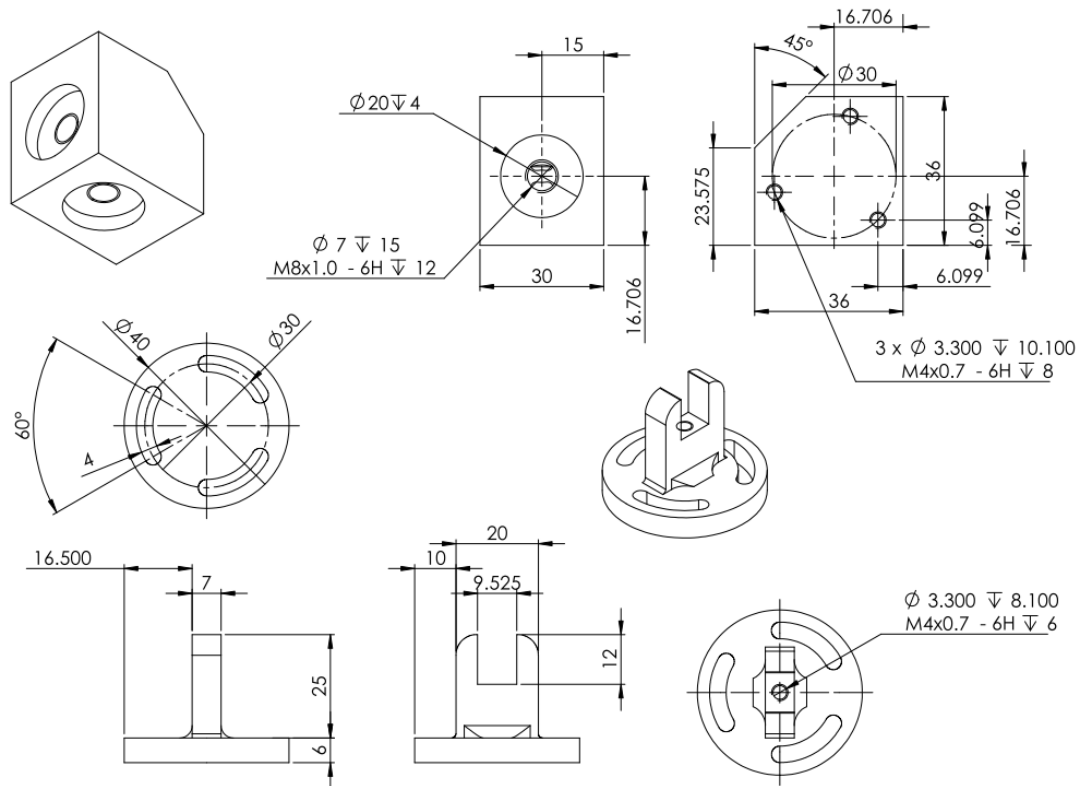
The rotating base drawings and vertical offset link designed to be milled
